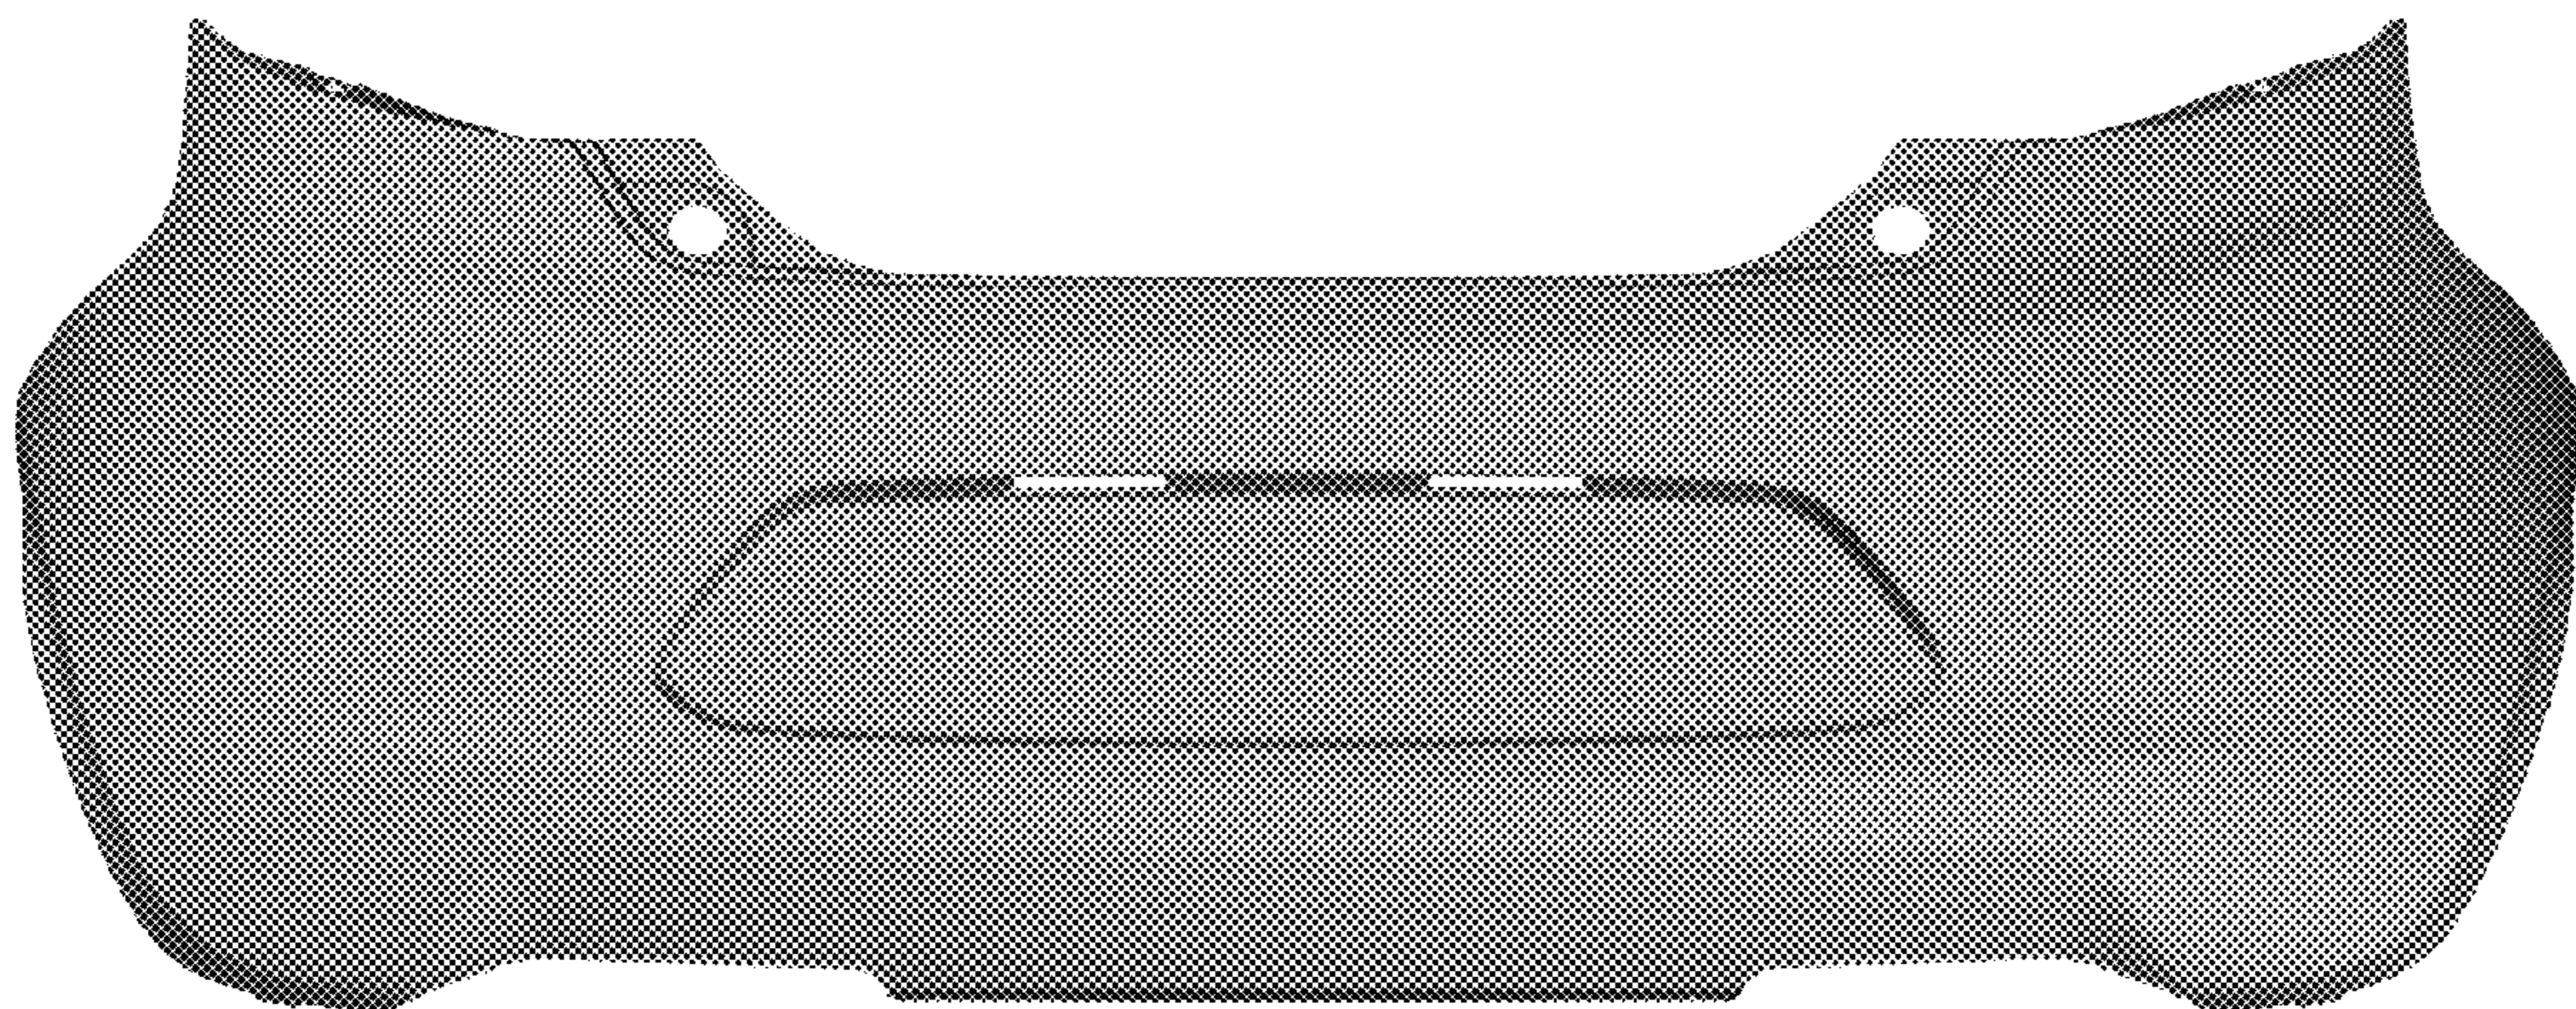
is a top plan view of the vehicle rear bumper cover;
